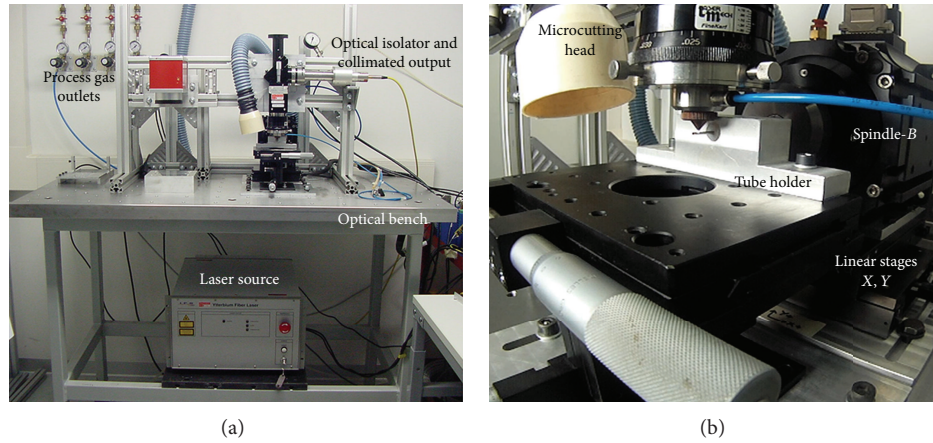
Laser microcutting setup used for the laser microcutting of AZ31 tubes.
